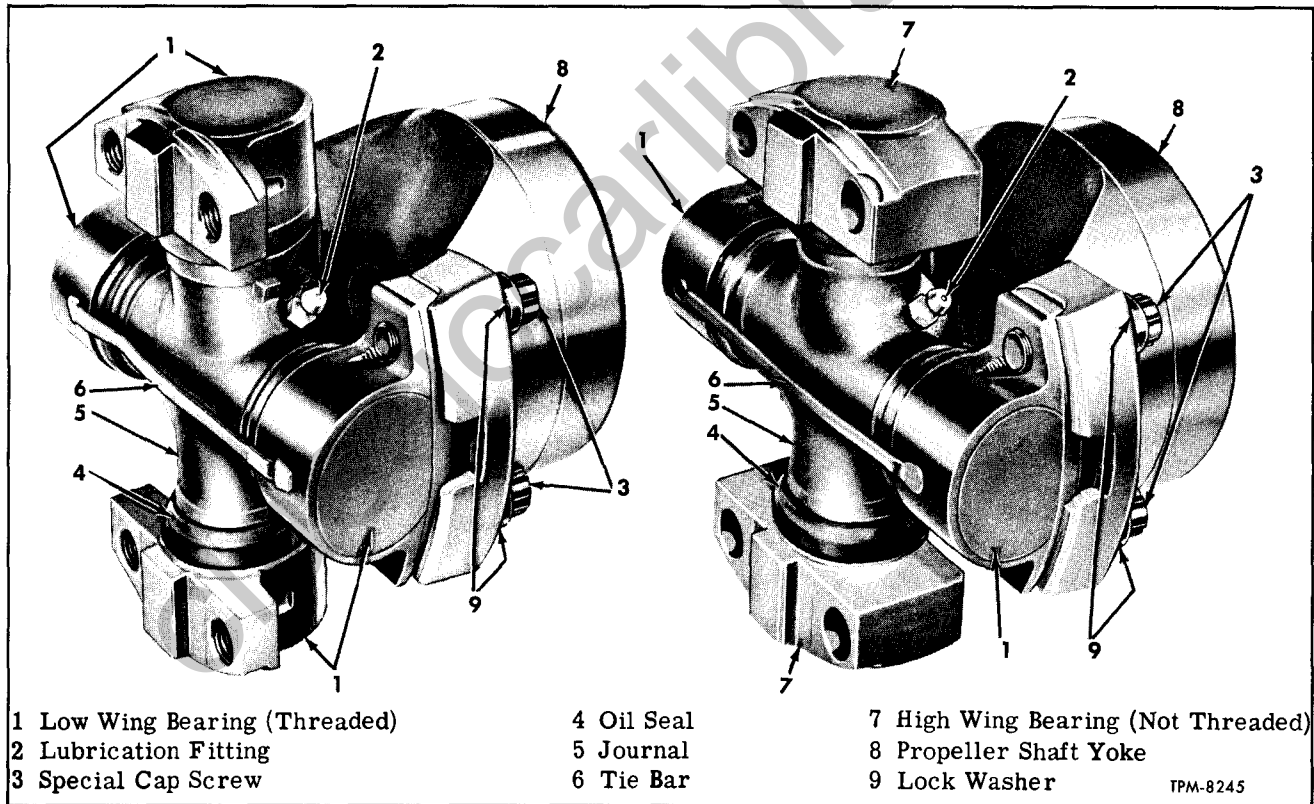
Type 58WB and 68WB Universal Joint Showing High and Low Wing Bearings
